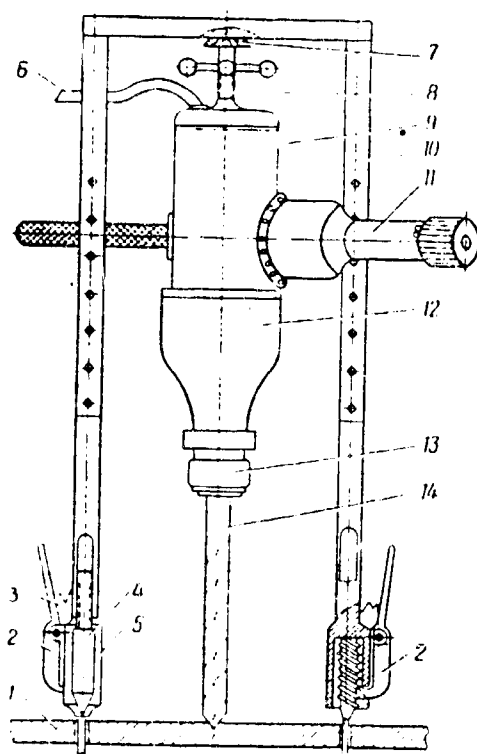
Electric Power Drill for Underwater Operations: 1- ship sheathing; 2 - pawls for gripping the pins; 3 - spring; 4 - pin; 5 - lateral support; 6 - current-conducting cable; 7 - crossbar; 8 - crosspiece; 9 - electric motor; 10 - post; 11 - handle; 12 - reducing gear; 13 - spindle with quickly-replaceable chuck; and 14 - drill.
